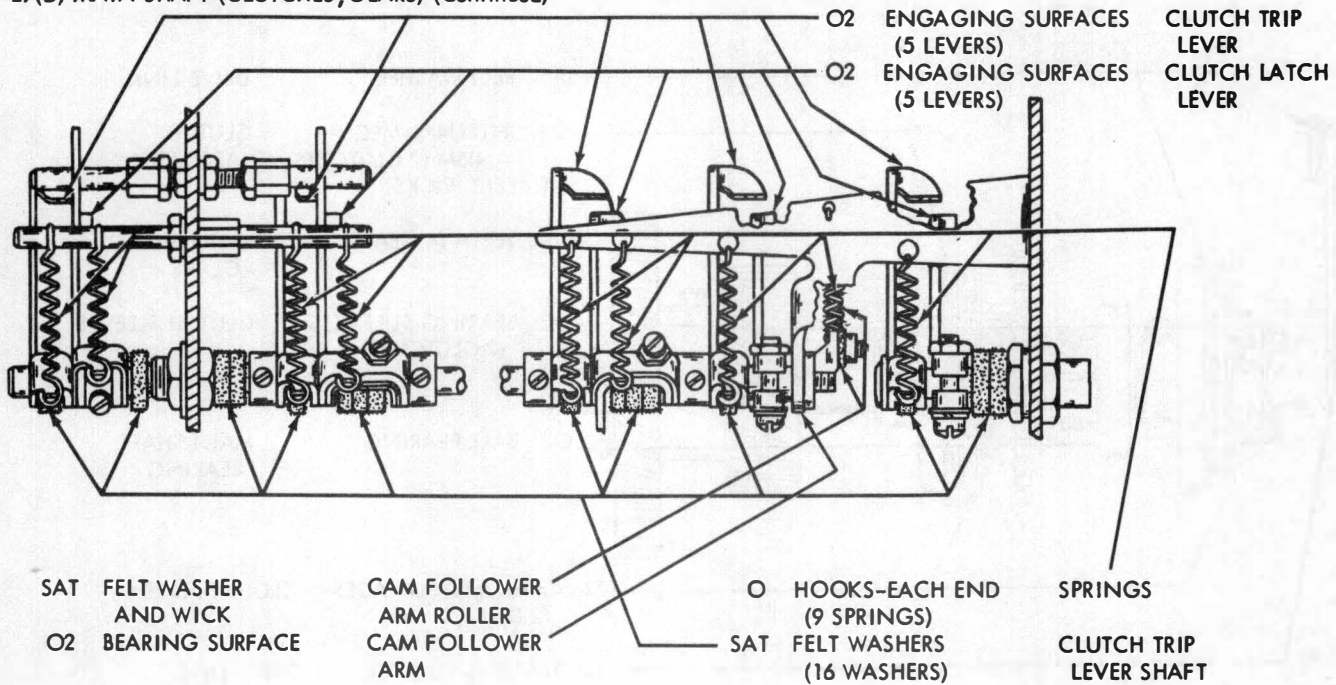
Automatic Typewriter Lubrication - Main Shaft, Clutches and Gears
